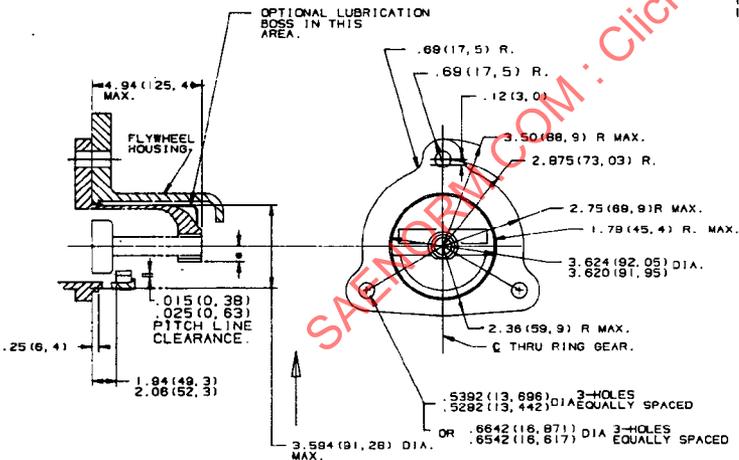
TYPE NO. 3 MOUNTING FLANGE HEAVY DUTY
